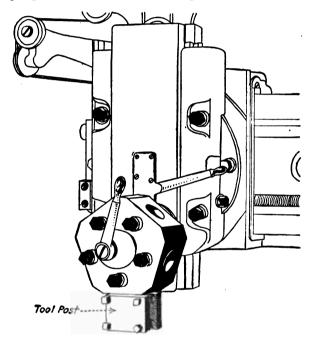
OPERATION TO REMOVE TOOL POST—30 TO 84-INCH GISHOLT BORING MILLS
